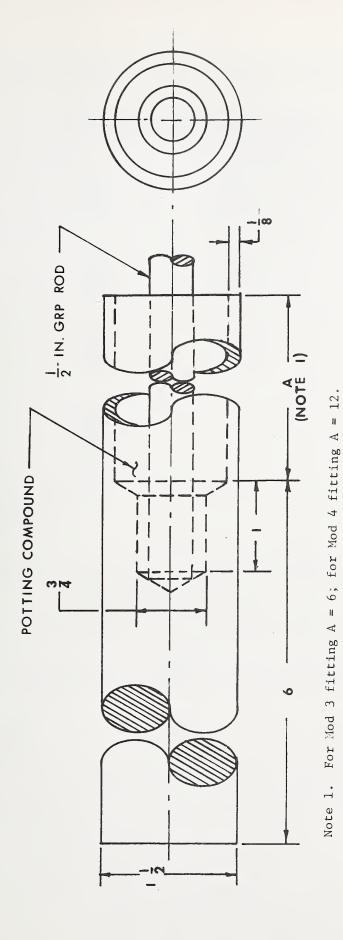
Schematic drawing of Mod 3 and Mod 4 experimental end fittings.
